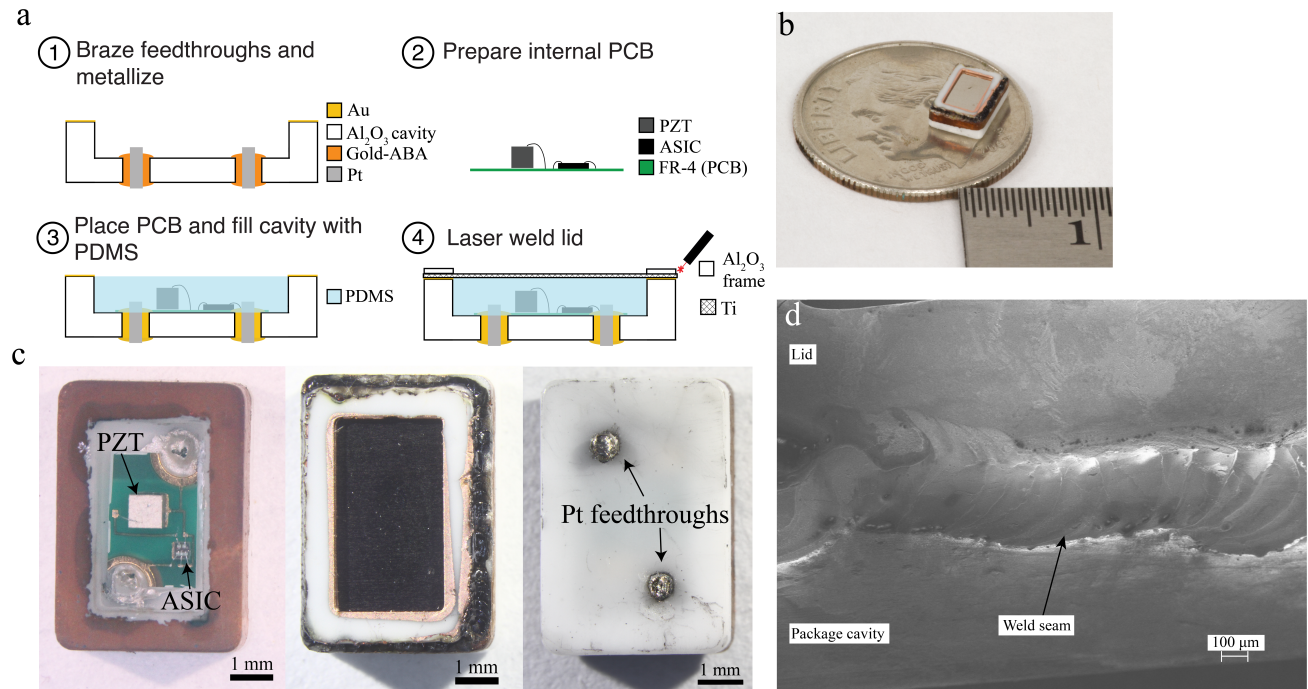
a) Packaging steps b) picture of a sealed package on a dime. c) Micrographs of the package prior to lid sealing, post lid sealing, and from the backside. d) SEM of weld-seam where the alumina frame is welded to the package cavity. A continuous weld can be seen, joining the two pieces together.
